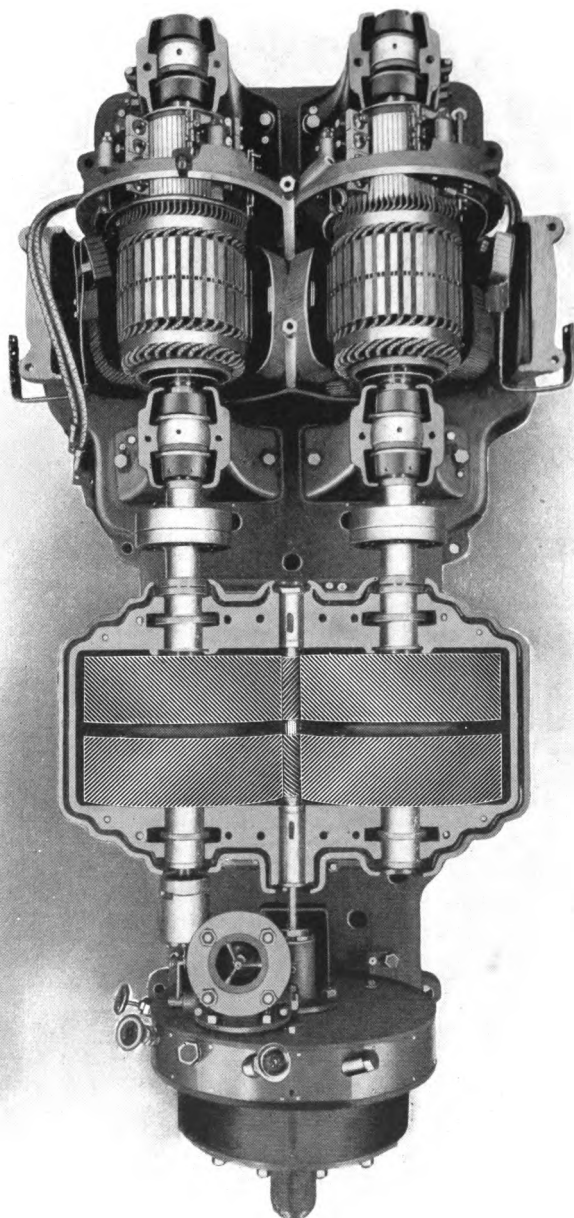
110 H. P. Turbine Dynamo—Upper Half of Gear Case and Field Frame Removed.
